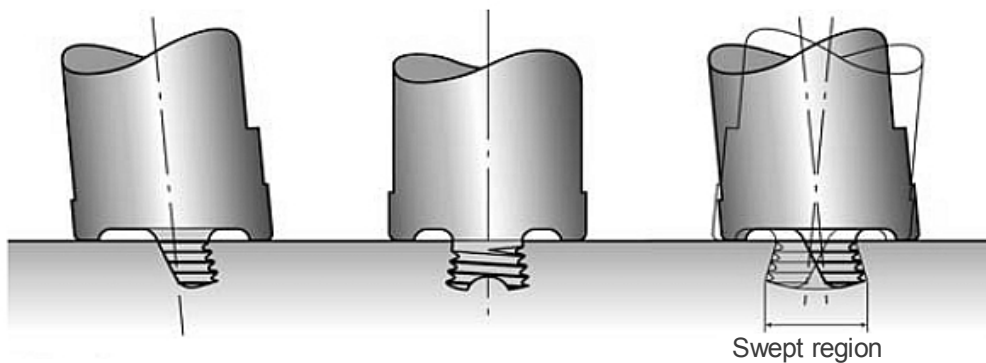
Principle of Skew-Stir™ FSW tool [37]
